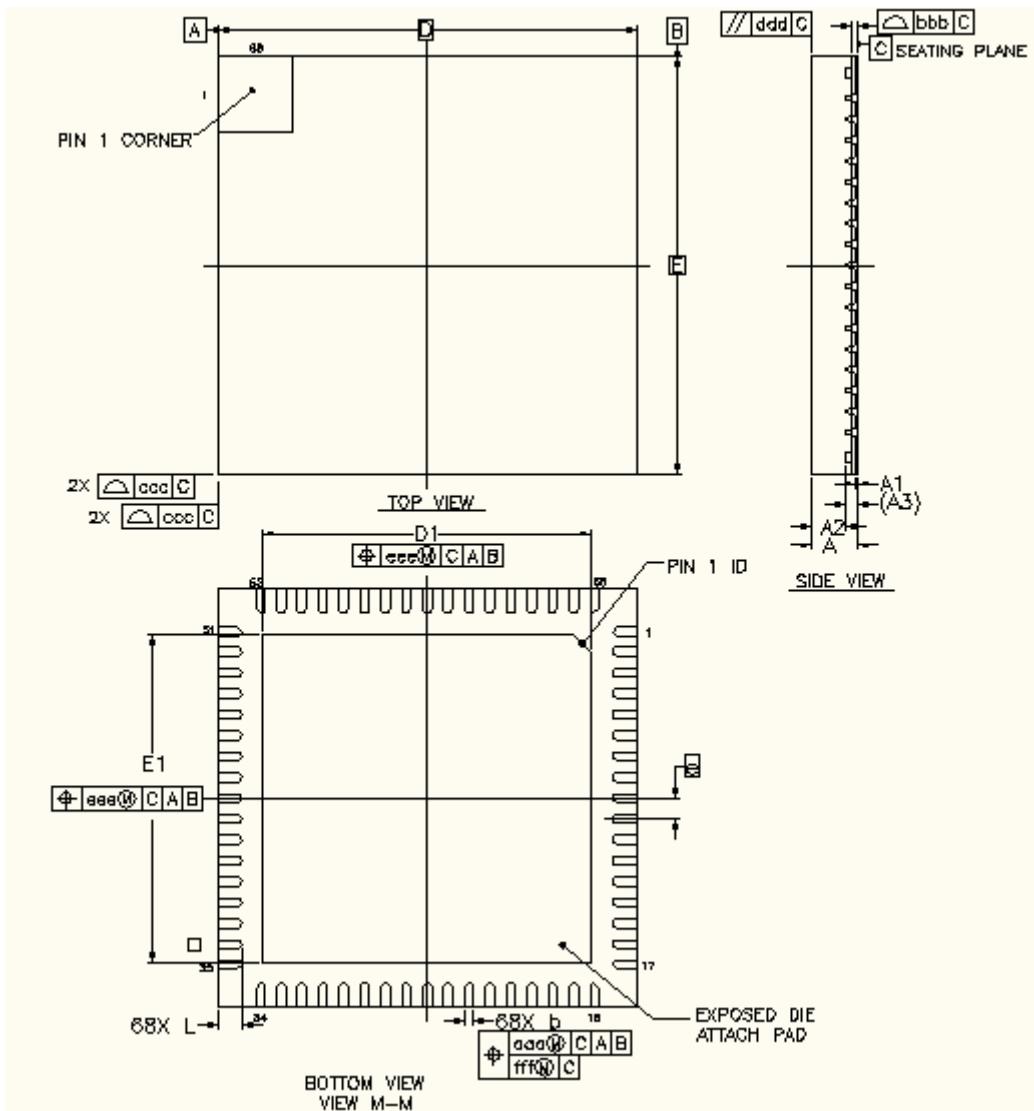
RK808-X QFN68 7mm X 7mm Package Top View
